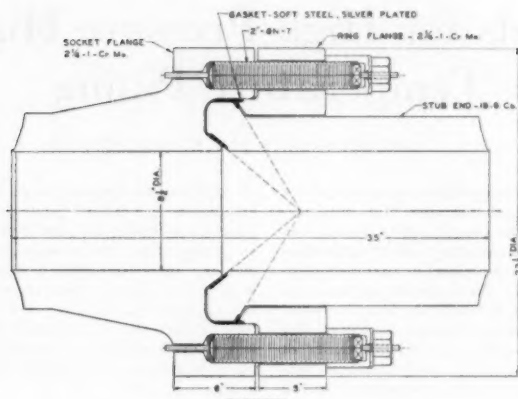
SECTIONAL VIEW OF PRESSURE-SEAL JOINT
